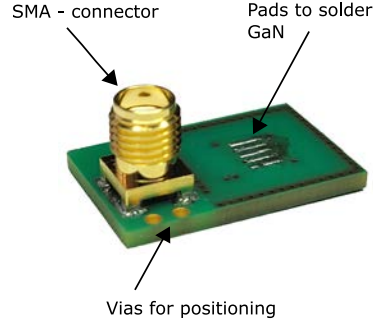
Adapter PCB with the SMA connector for the measurement output and the solder pads for the GaN-switch.
